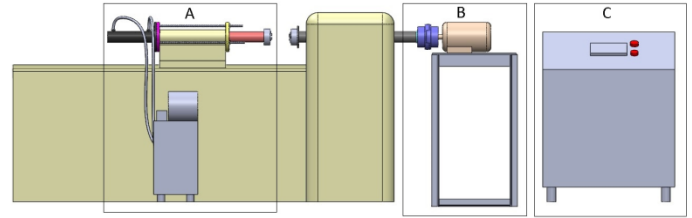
Schematic of the friction welding system, (A) Compression unit, (B) Drive unit, (C) Automation unit.
